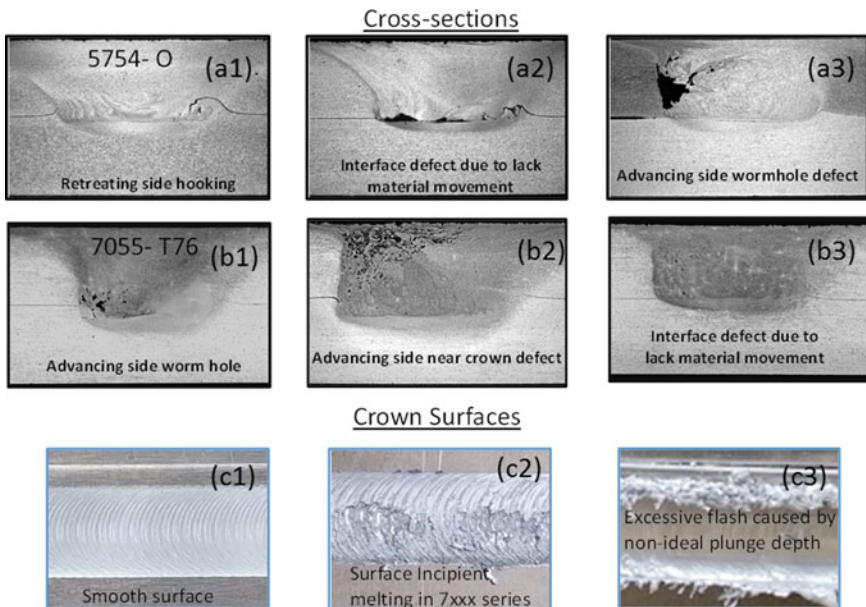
An overview of types of weld defects observed in FSLW. a 5754-0 Lap joints, b 7055-T76 lap joints, c 7055 crown surface
